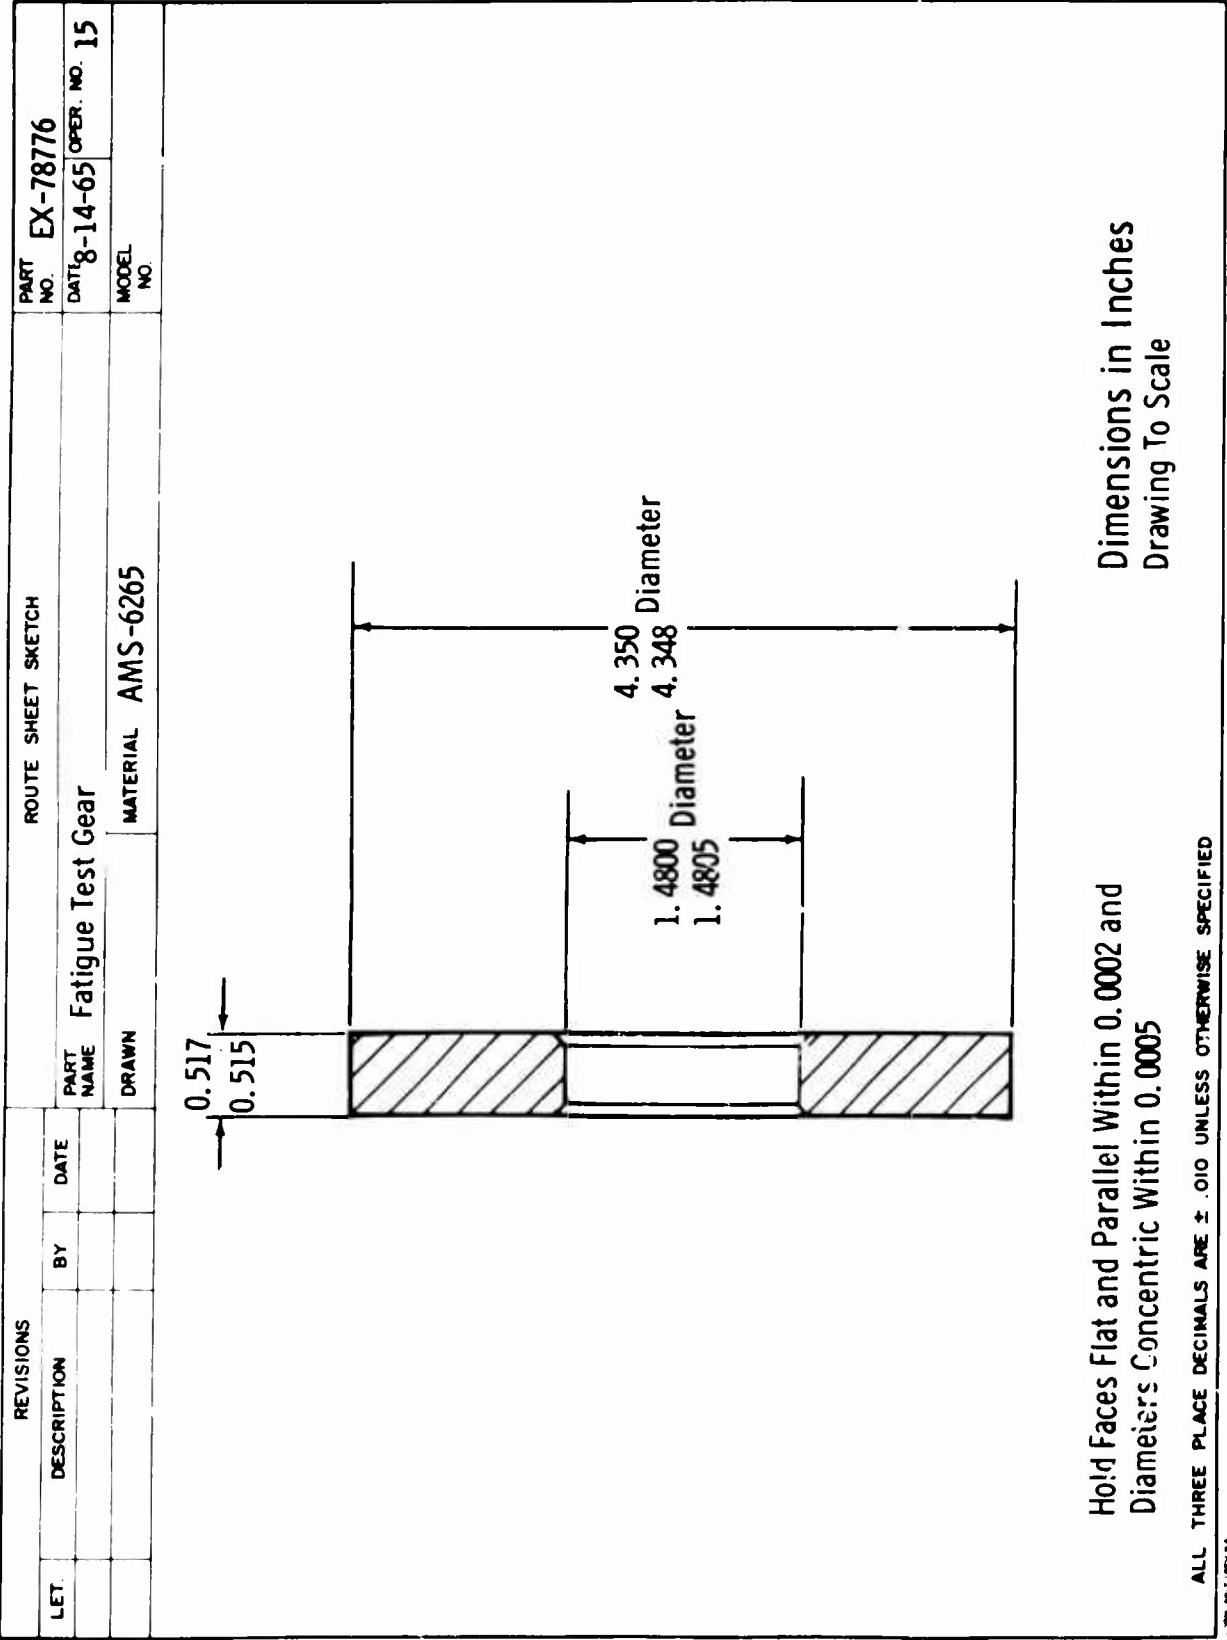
Typical Routing Sheet for Protuberant Hobbed Gear, EX-78776 (Sheet 8 of 9).
